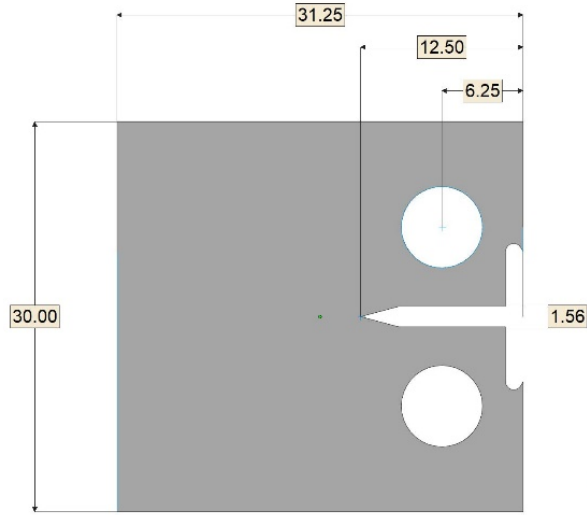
ASTM E399 CT fracture toughness specimen size, units in mm
